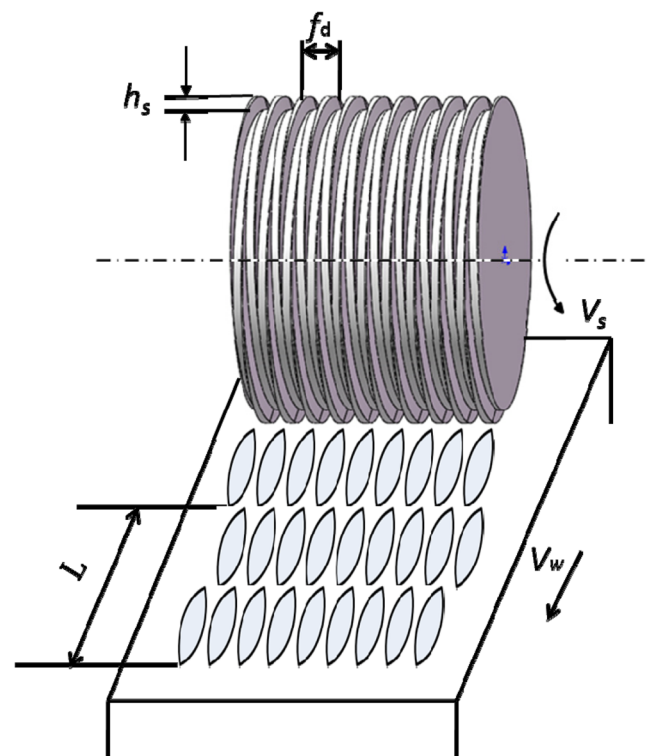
Schematic views of grinding with the pattern wheels for shaping texture on cylinder surfaces
